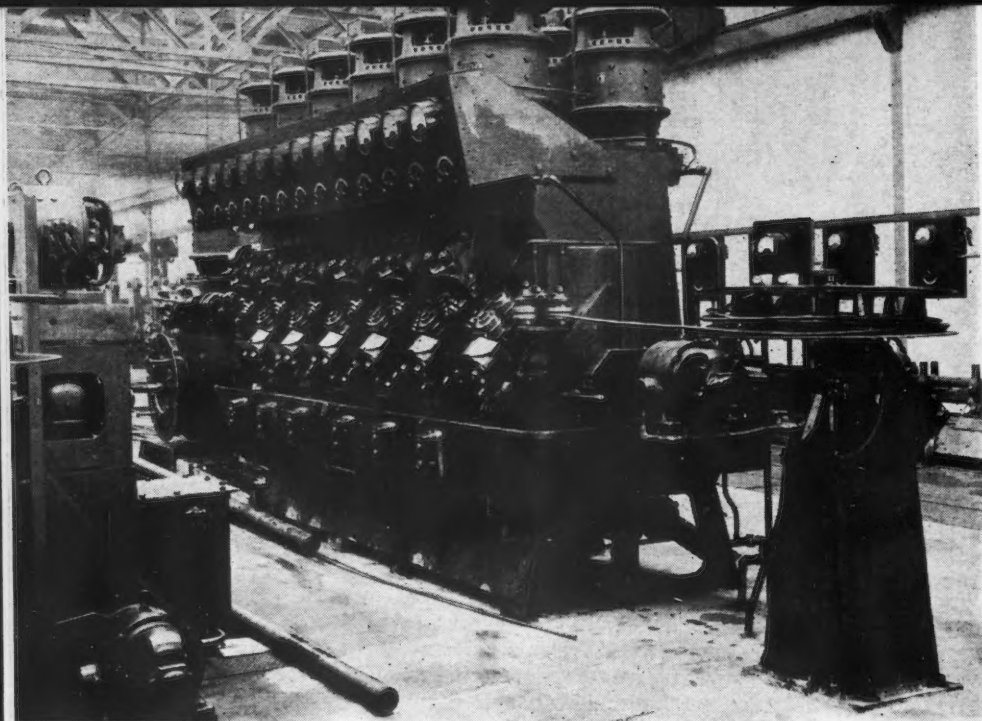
Continuous wire rod mill used for rolling all of the alloys made at Heraeus Vacuumschmelze except nickel-beryllium or beryllium-copper. On this type mill octagon bars 2.4 in. in thickness were reduced to 0.6 in.
